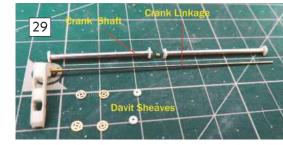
The crank, linking and shaft that couples up the davit and upper platform; also shown is the davit arm with the hand winch, plus parts for the sheaves.
